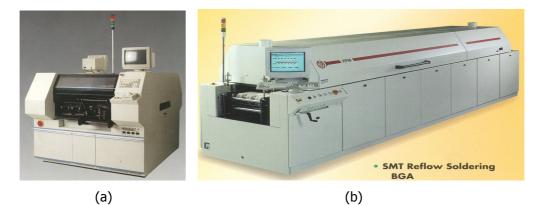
(a) Universal 4681 GSM1 multi functional fine-pitch placer (b) BTU forcedconvection reflow soldering machine.
